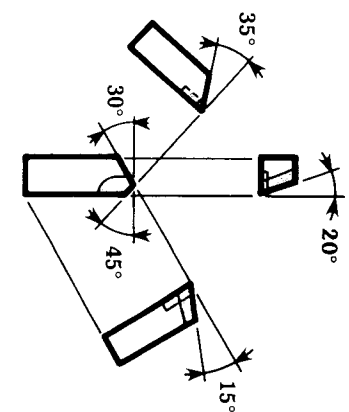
Typical carbide insert cutter bit for inserted type rough face milling cutter.
